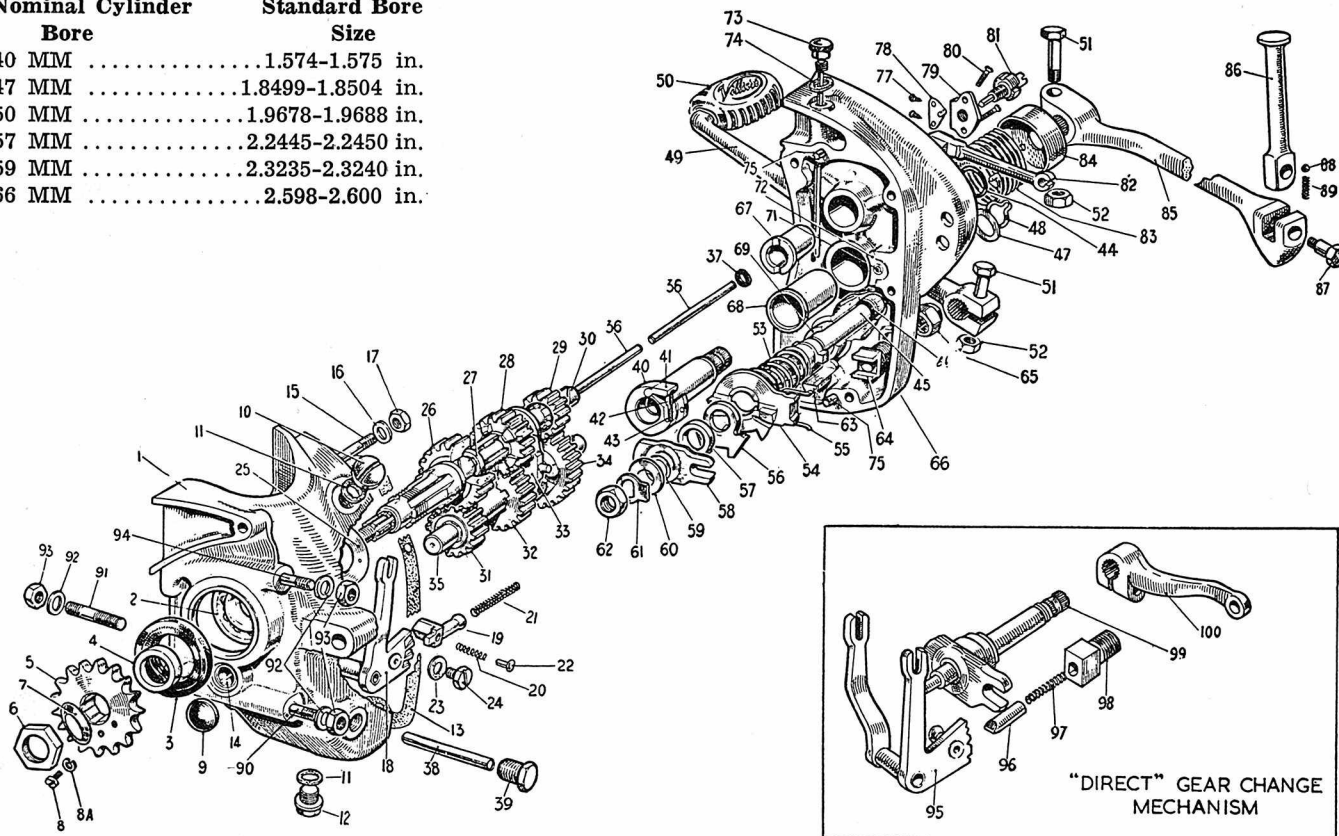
Exploded view of typical three speed transmission used on Mark 2L, 9E and 31C.
